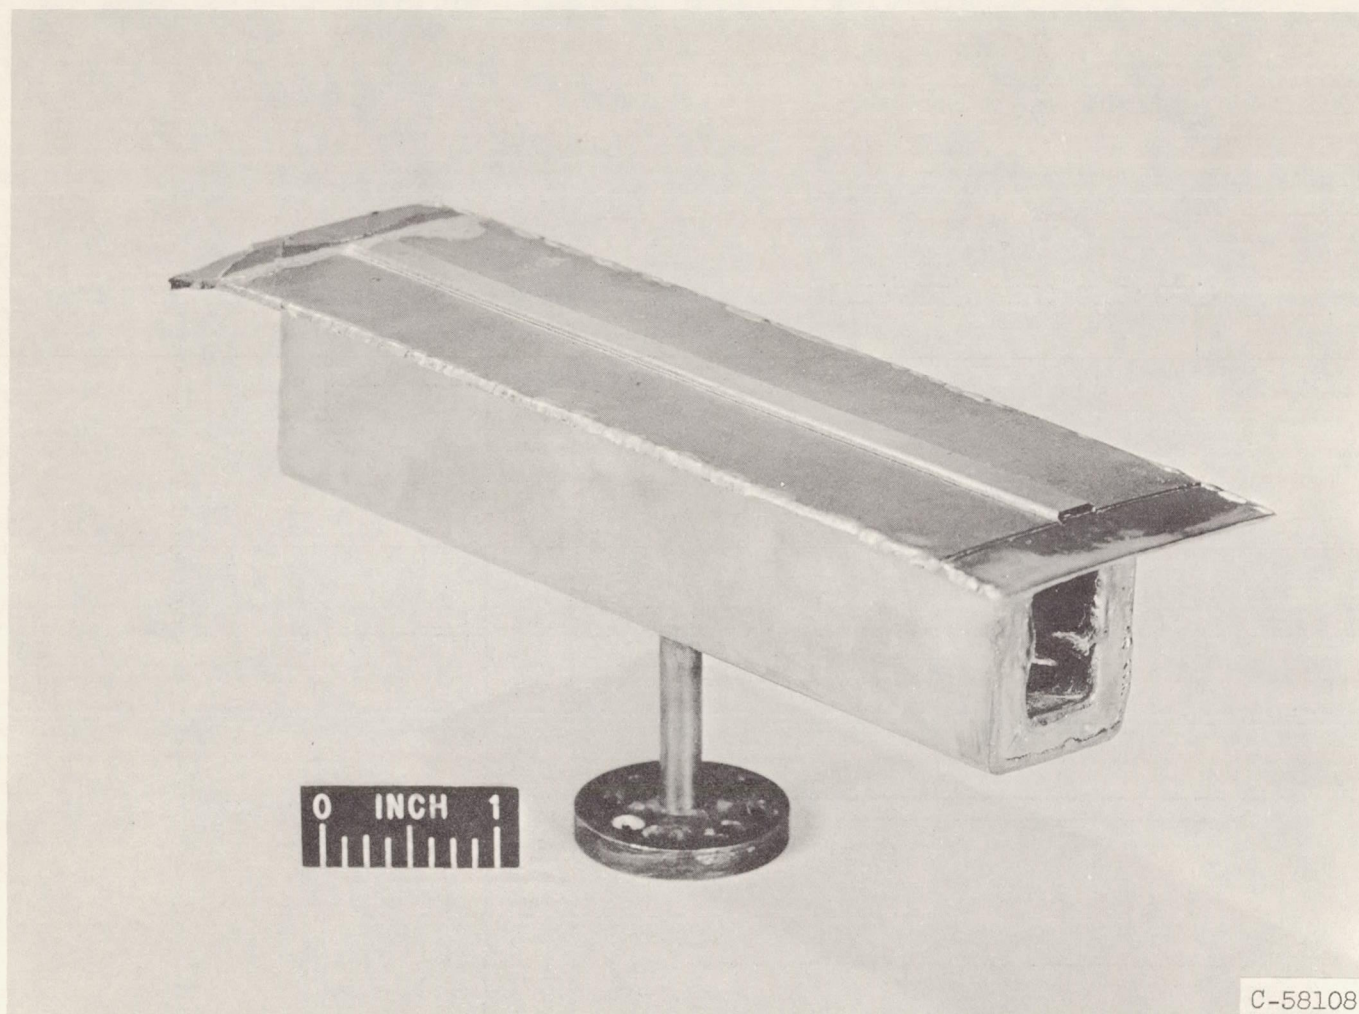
First ionizer successfully constructed by means of electron-beam welding techniques.
